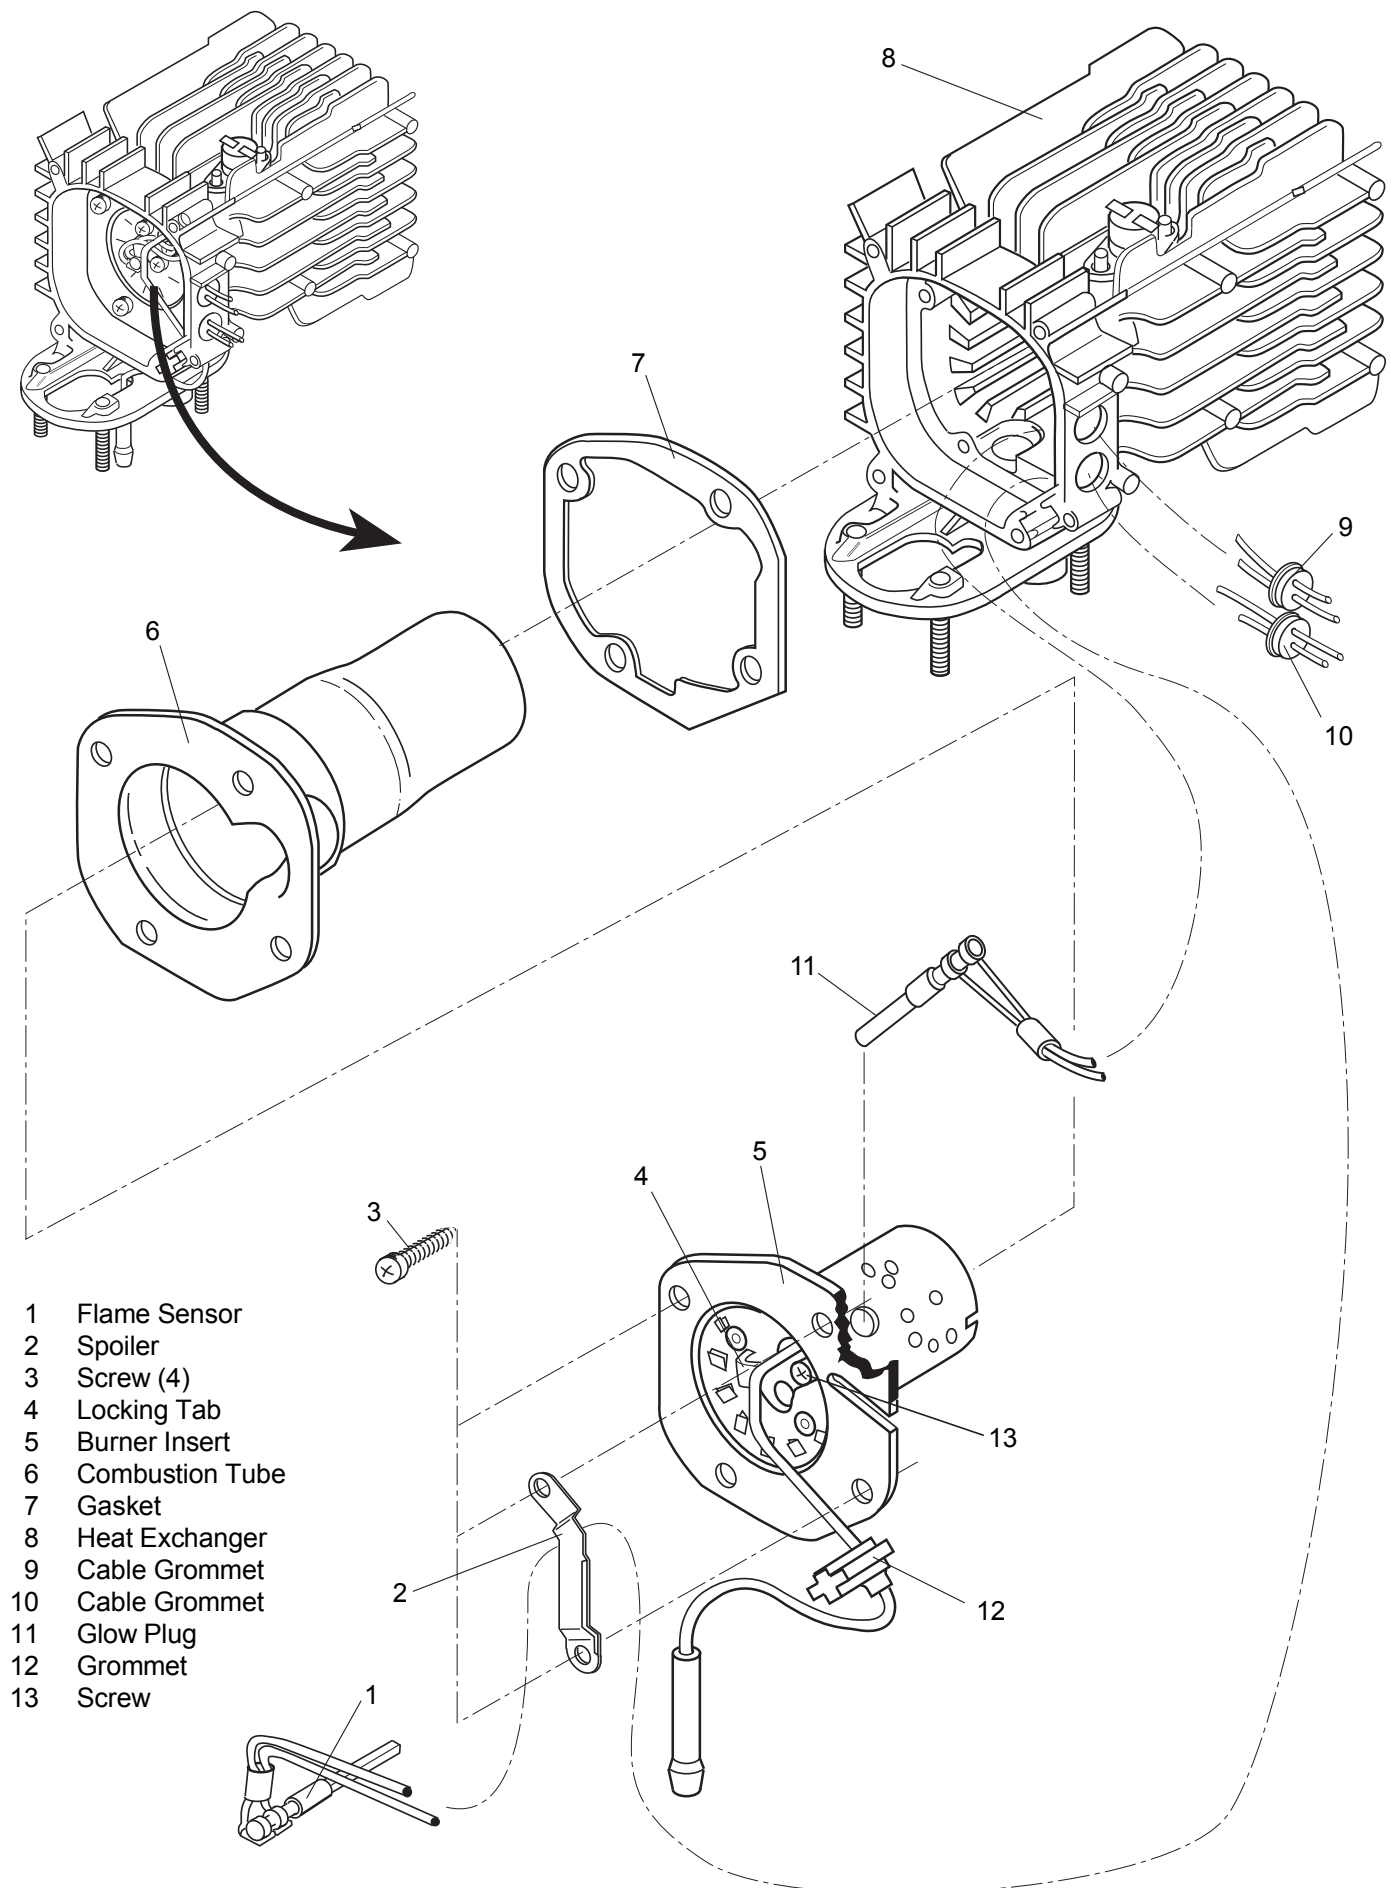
Disassembly of Heat Exchanger (Sheet 1 of 2)
